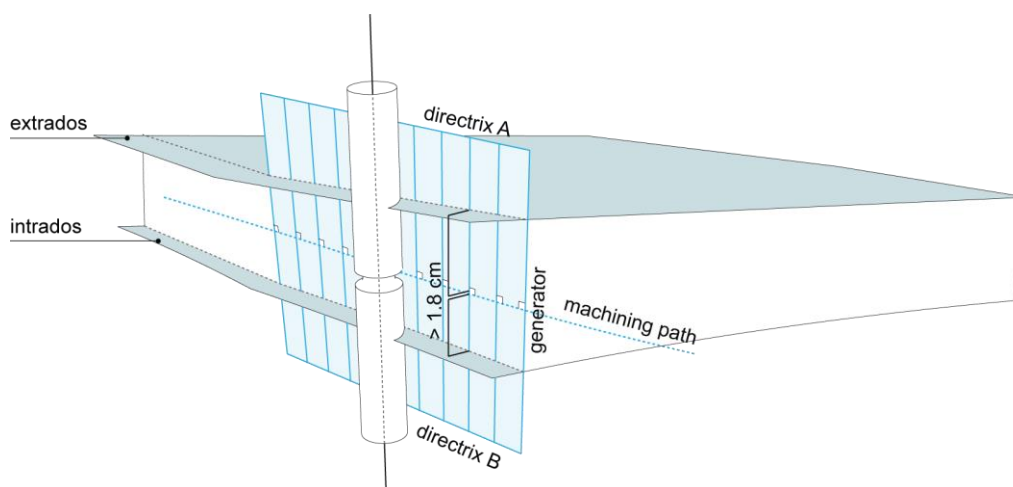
Doubly ruled surface constraints define the machining path of a profiling tool.
